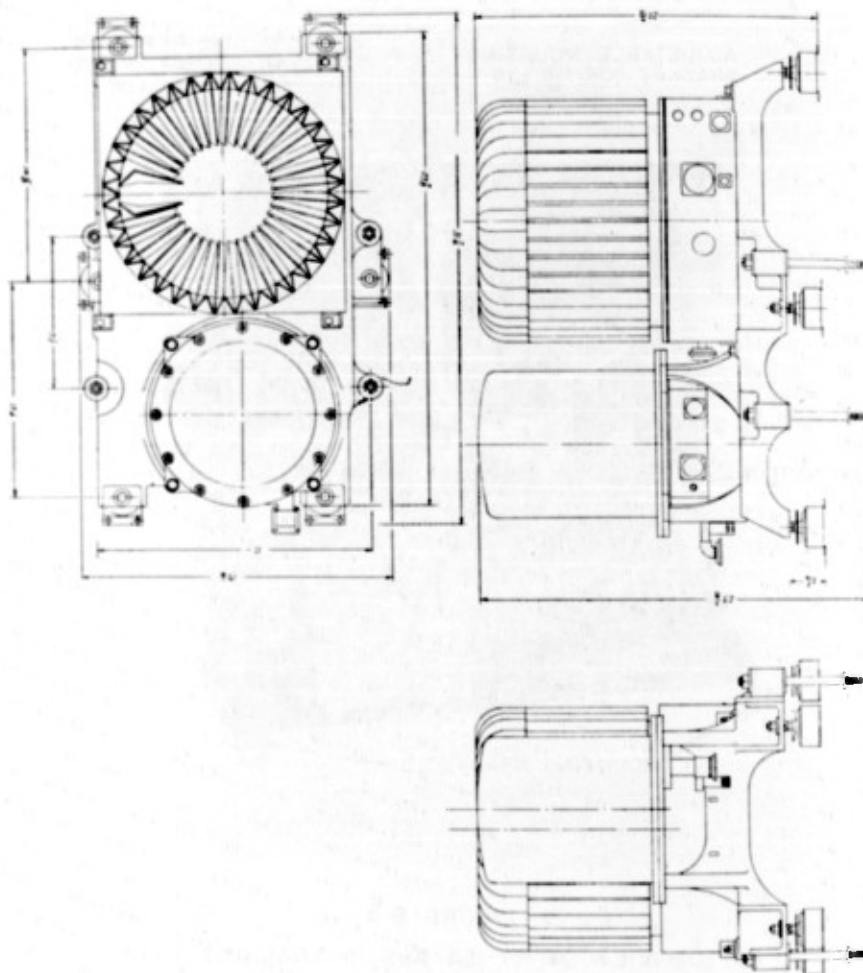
OUTLINE DRAWING OF COMPLETE ASSEMBLY
